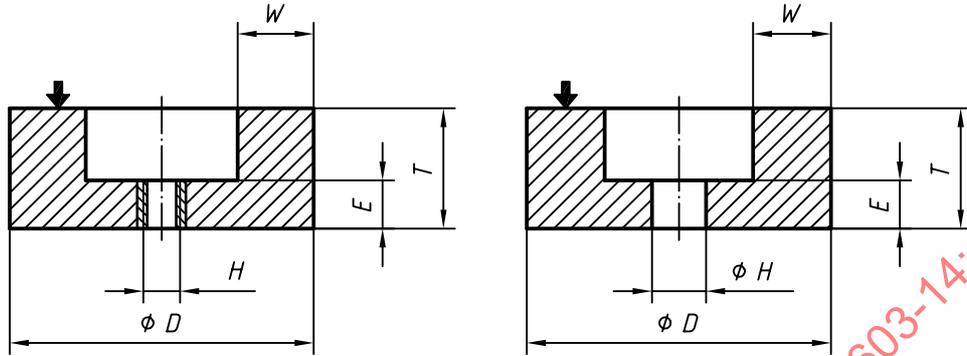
Type 6<sup>2)</sup> without prong anchor bushing or full metal back bushing
